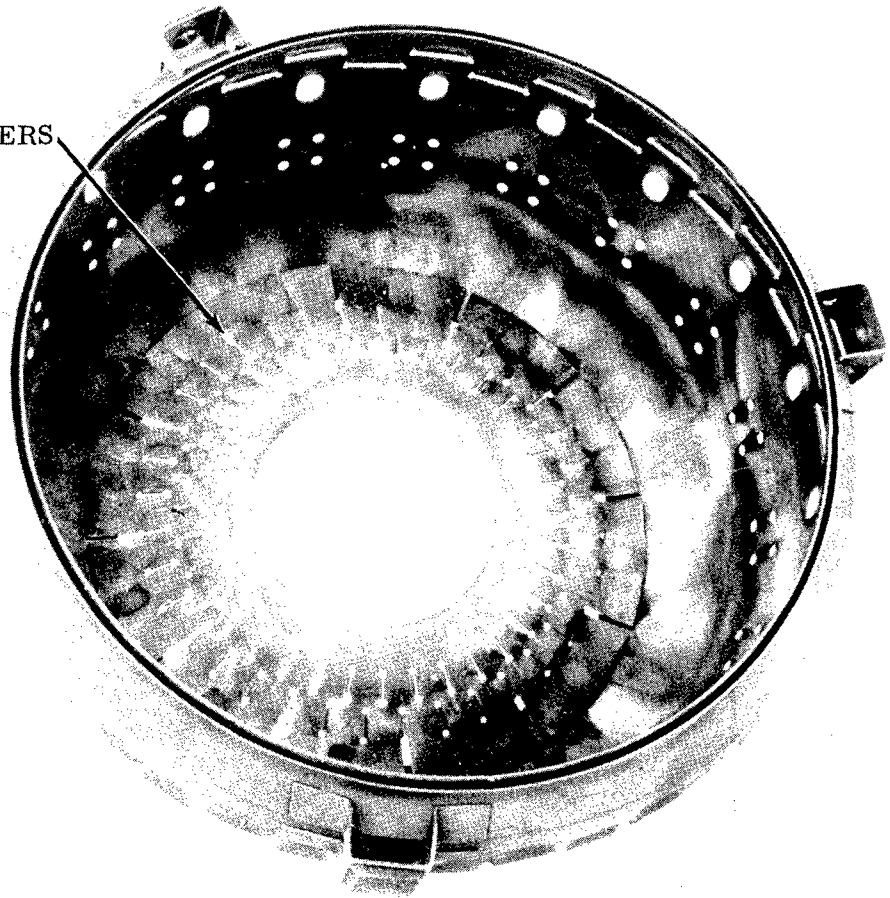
Three-Quarter View of Outer Combustor and Swirl Vane Assembly Showing Swirl Vane Louvers.
